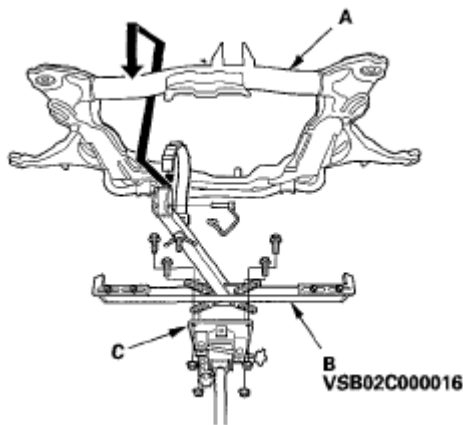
Identifying Front Subframe, Front Subframe Adapter And Jack
